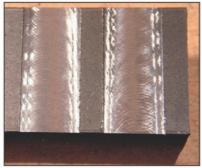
A test piece machined with a sharp cutter. On the right the trailing edge of the cutter was lowest and back cutting has occurred, on the left the leading edge of the cutter was lowest.
